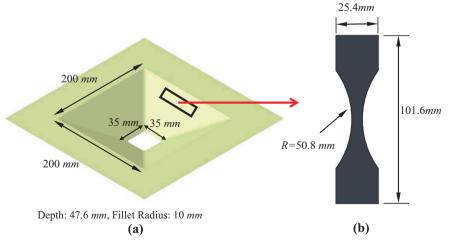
The shape and dimensions of pyramid and fatigue test specimen, (a) pyramid, (b) fatigue test specimen.
